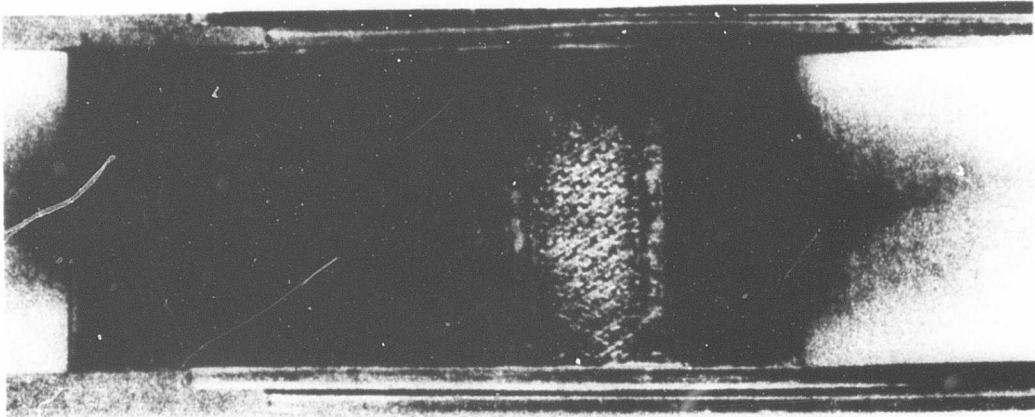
Fully Welded Convex Side of a Blade.
